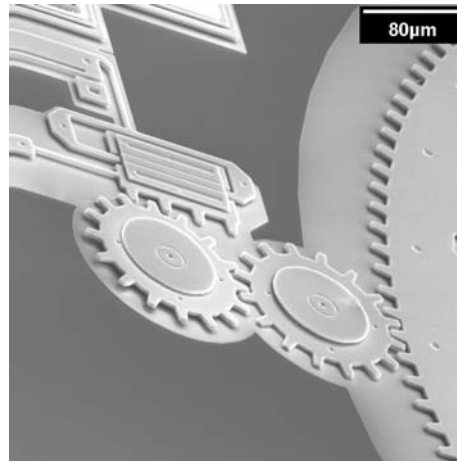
MICROMACHINED GEAR DESIGN (PHOTO COURTESY OF SFU IMMR)
